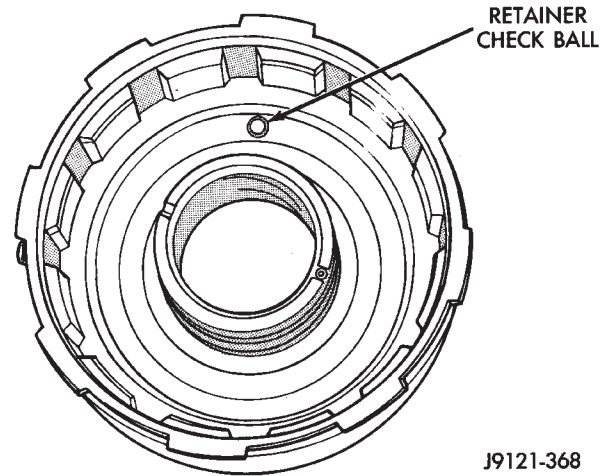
Front Clutch Piston Retainer CheckBall Location
